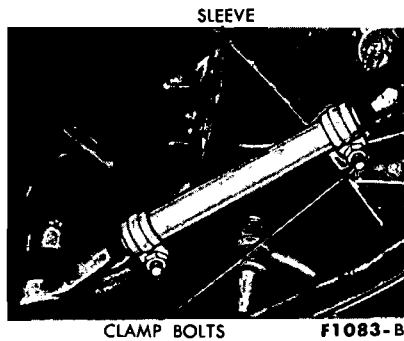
Spindle Connecting Rod Sleeve—Typical
